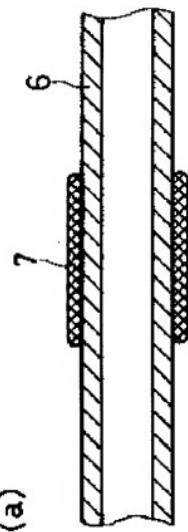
It is a tubular shaft sectional view of the mounting parts of a marker (conventional example).
